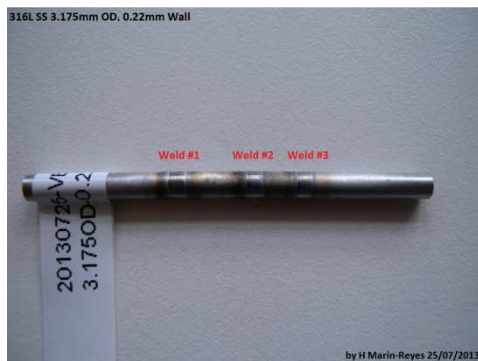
(a) Welds #1 to #3 on 3.175mm OD, 0.220mm wall 316L SS tube
